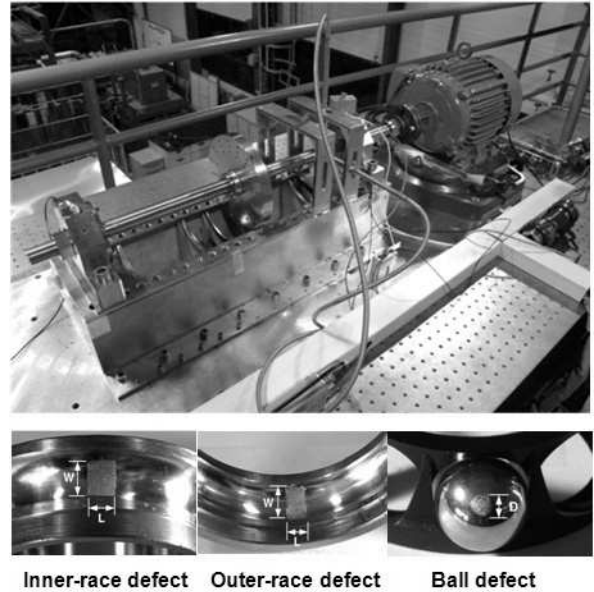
Test section to simulate rotating machinery with bearing faults (defect width, $W = 8\text{mm}$)
